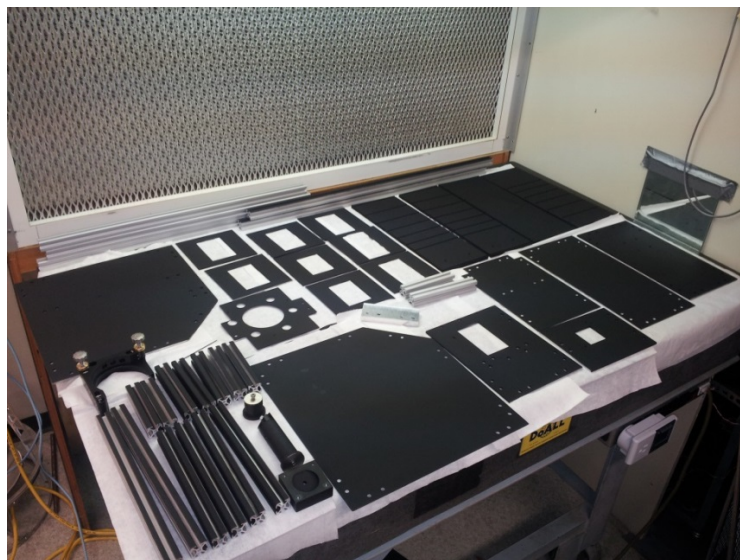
Aluminum extrusions and panels used to build pointing system enclosure.
